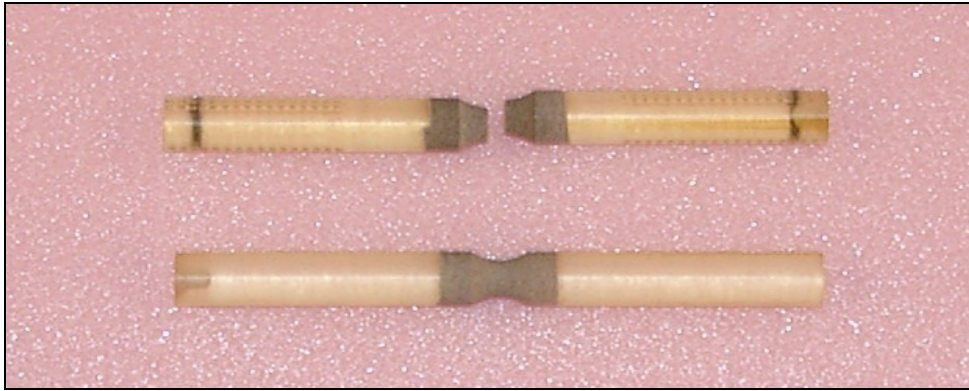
Post-test specimen (above). Pre-test specimen (below)
